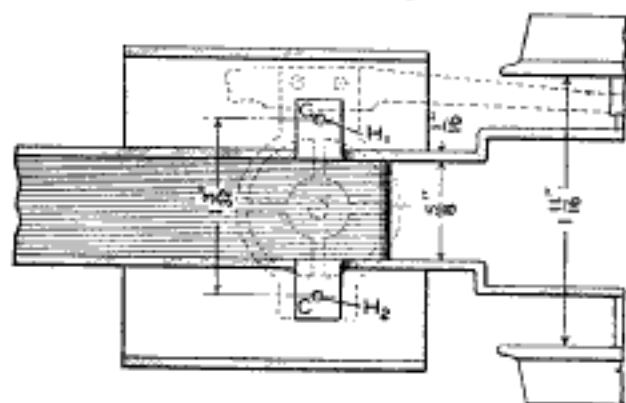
View of the Under Side of the Motor, Showing How Switch is Fixed into Place
